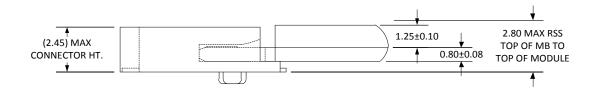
H2.5-S2 - Stack-up Top Mount Single-sided Module for 1.35 Maximum Top-side Component Height and with Higher Clearance above Motherboard
